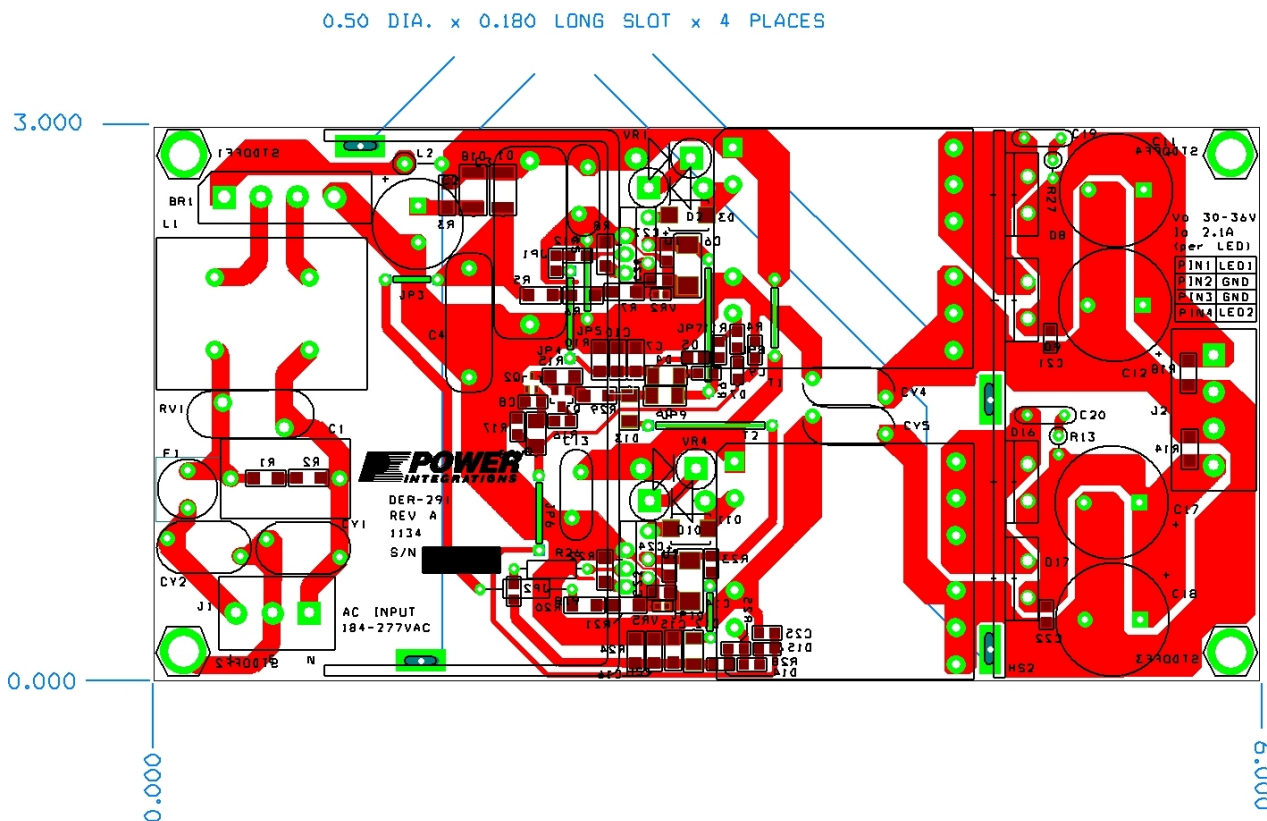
Printed Circuit Layout, Top and Bottom (3" x 6").
